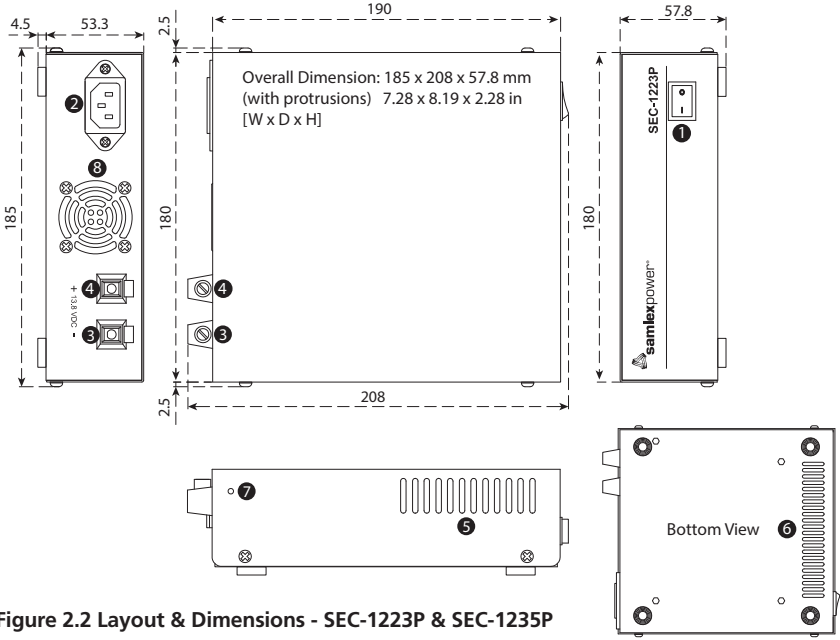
Layout & Dimensions - SEC-1223P & SEC-1235P
